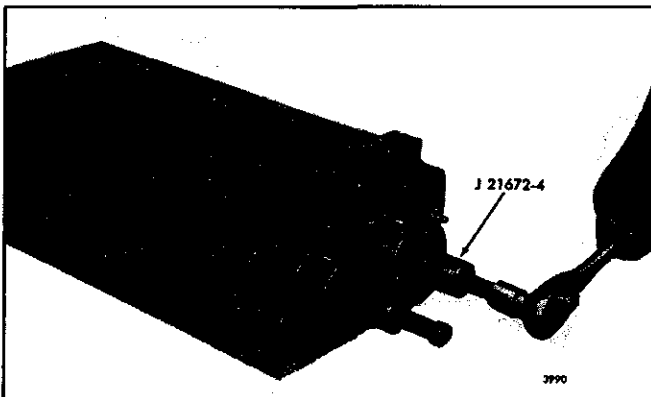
Removing Blower Rotors from Front End Plate Ball Bearings (Former Blower) Using Tool J 21672-4
